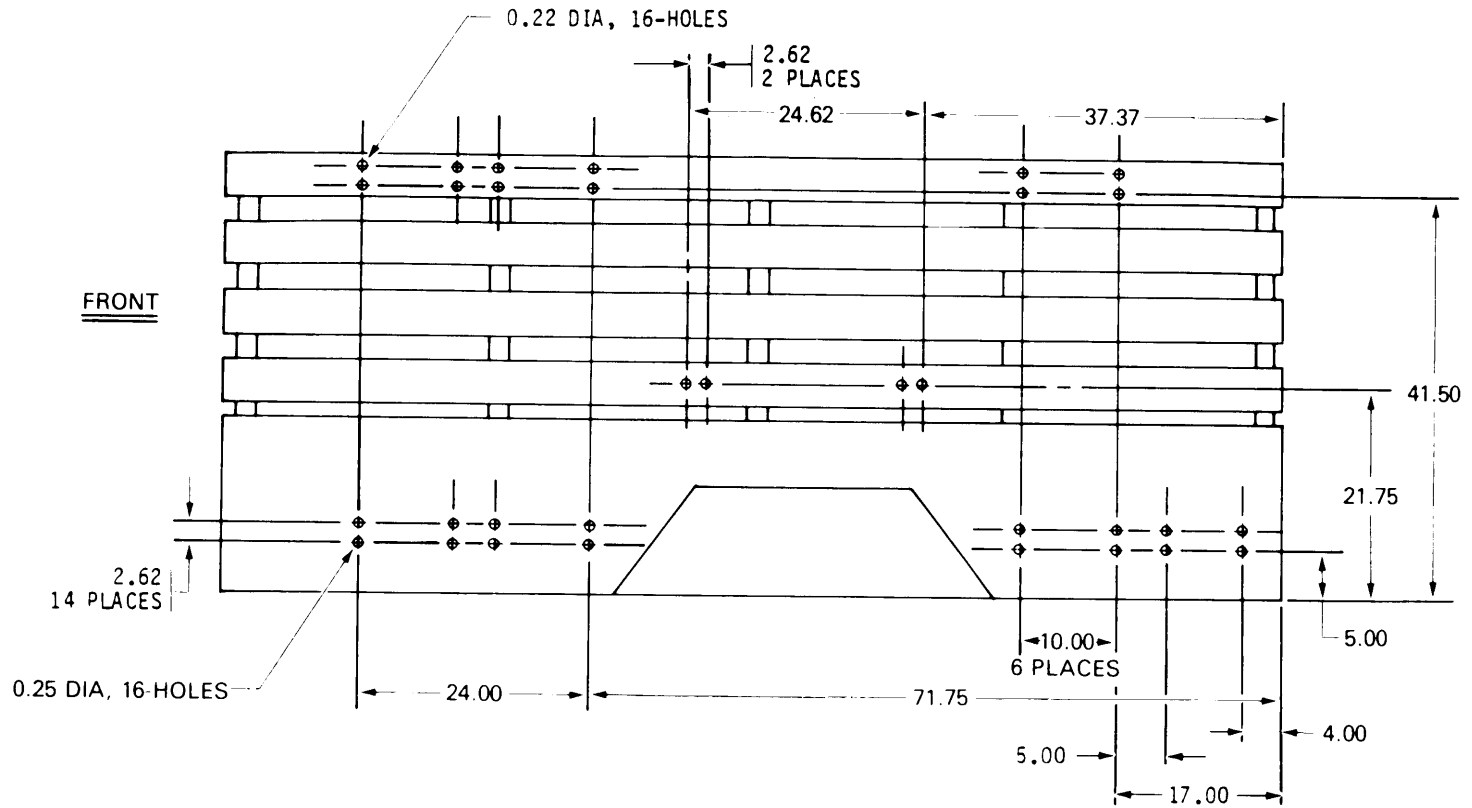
Hole Dimensions for Blind Rivet Nuts and Strap Loops, Unit 2, M105A2, Right Side Elevation.
